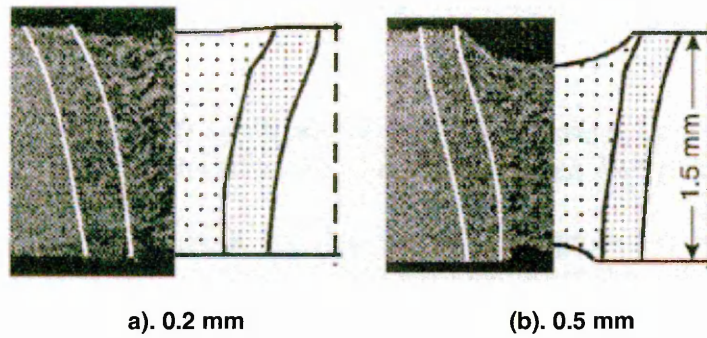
Weld cross sections in butt joints with smaller (a) and larger (b) gap widths⁶⁷
